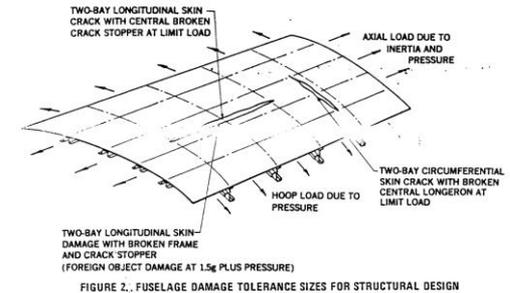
FUSELAGE DAMAGE TOLERANCE SIZES FOR STRUCTURAL DESIGN
